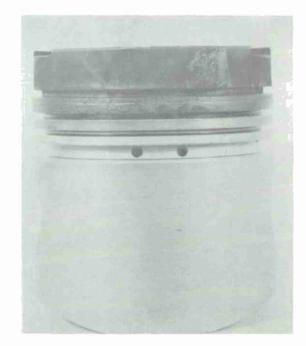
TACOM ENGINE PISTON TOPS-120 HOUR TESTS
